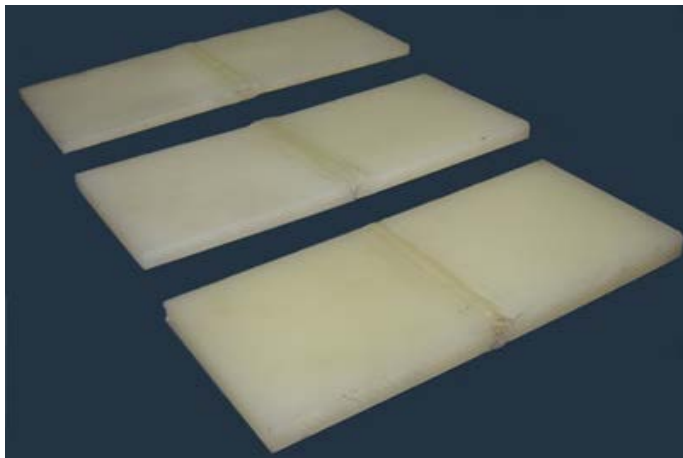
Exemplary welded joints made of thermoplastics prepared for a visual test [2]
